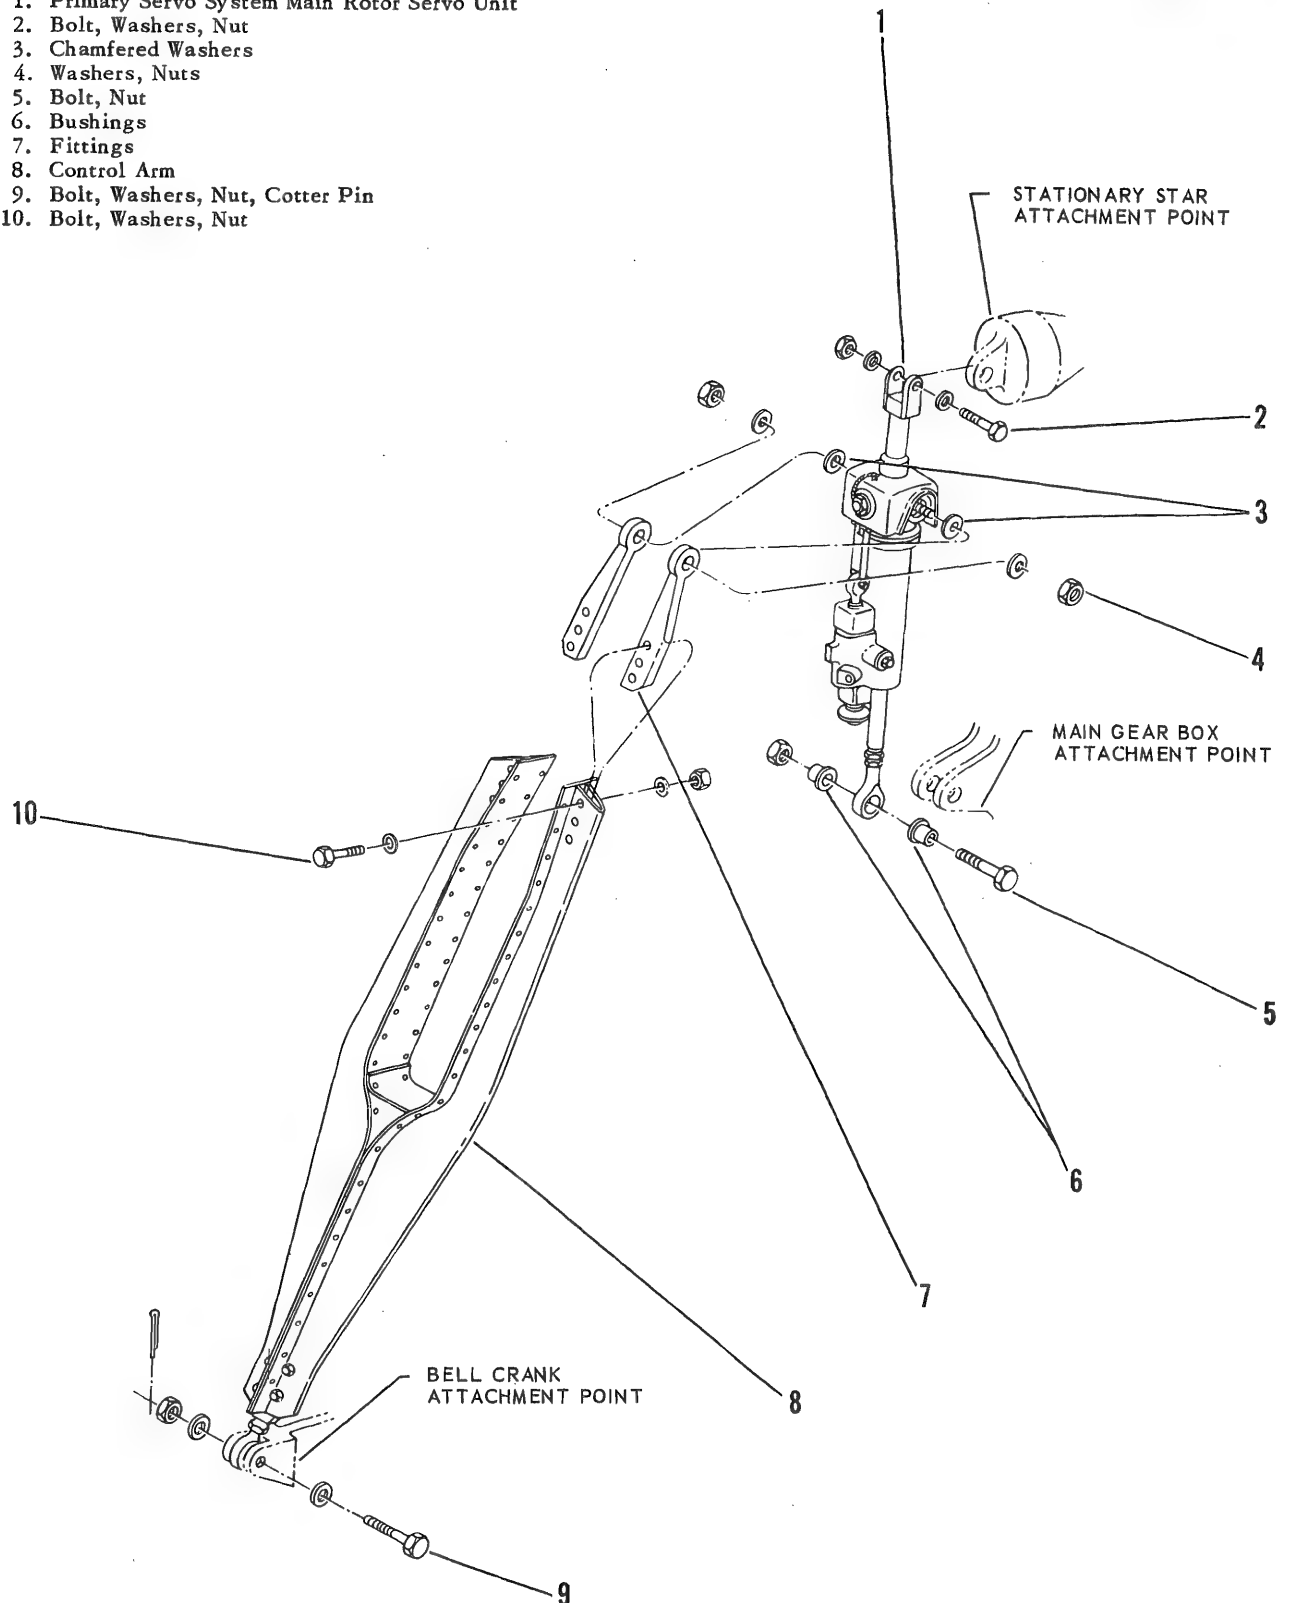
A. Main Rotor Primary Servo and Sheet Metal Control Arm Removal and Disassembly
